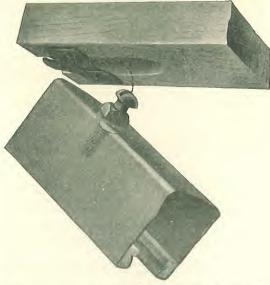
Fig. B. Close View Showing Slotted Plate and Adjusting Screw.
